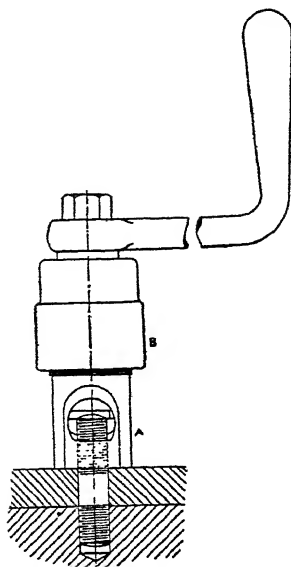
CUTTING A FEMALE THREAD WITH A TAP
